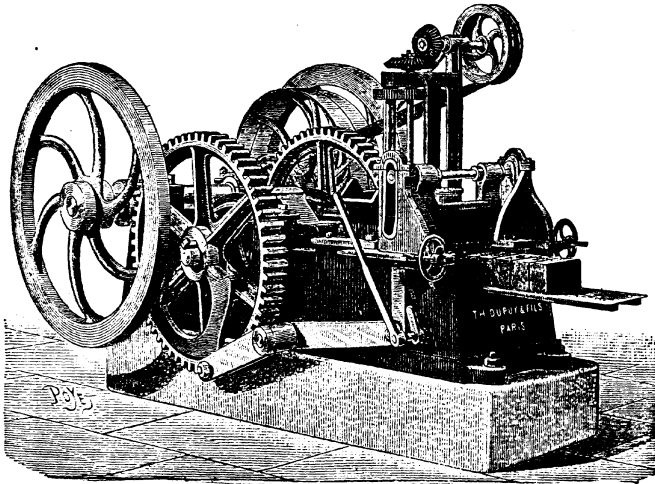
Machine for making wood charcoal briquettes or coal blocks with horizontal piston.
